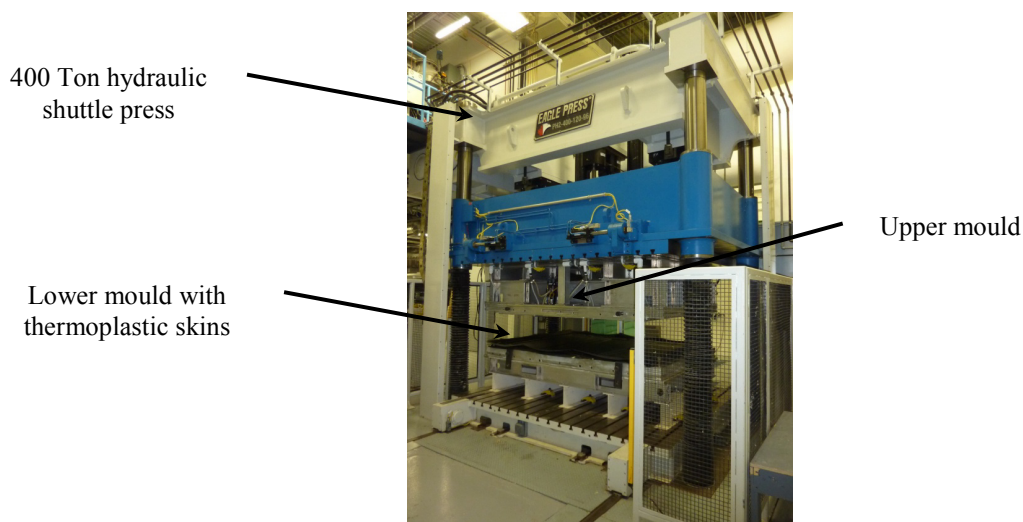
Three cavity panel mould located in the Eagle Press.
